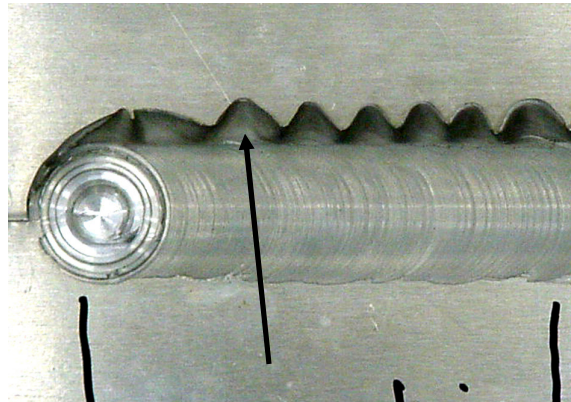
Side flash obtained during a trial weld at the Port Elizabeth Technikon
